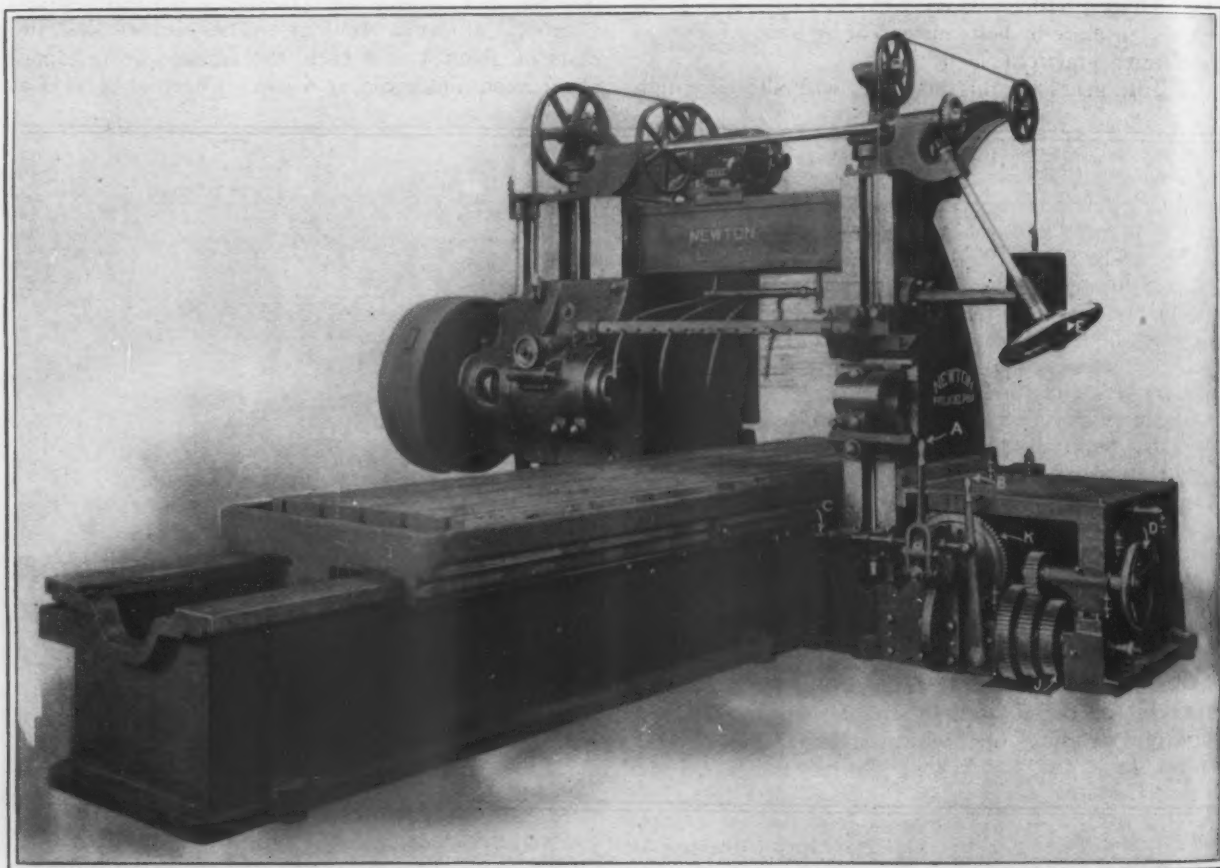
Operating Side of a 50-In. Horizontal Miller, Built by the Newton Machine Tool Works, Inc., Philadelphia, Pa.
